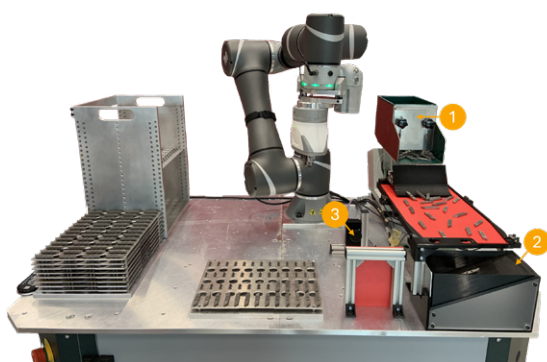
Modified cell. (1) Parts feeding system, (2) overflow container, (3) parts inspection camera.
